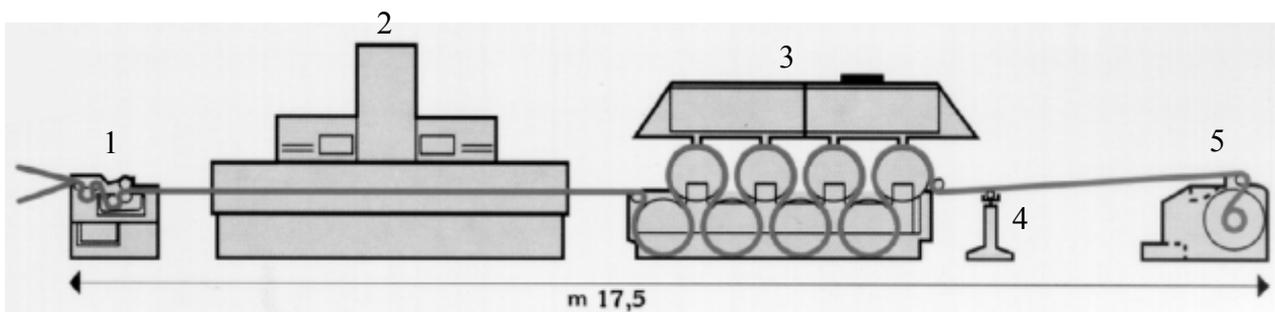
Sizing machine: 1 – Size vat; 2 – Radio-frequency oven; 3 – Drum drying machine; 4 – Waxing device; 5 – Beaming.
